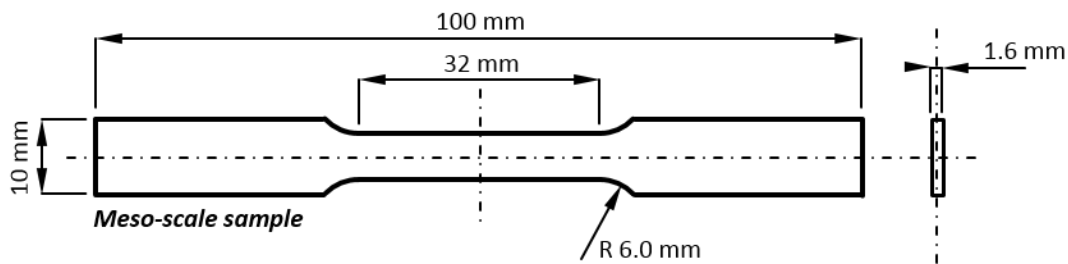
Engineering drawing of sub-size test specimen used for the ex situ experiments.
